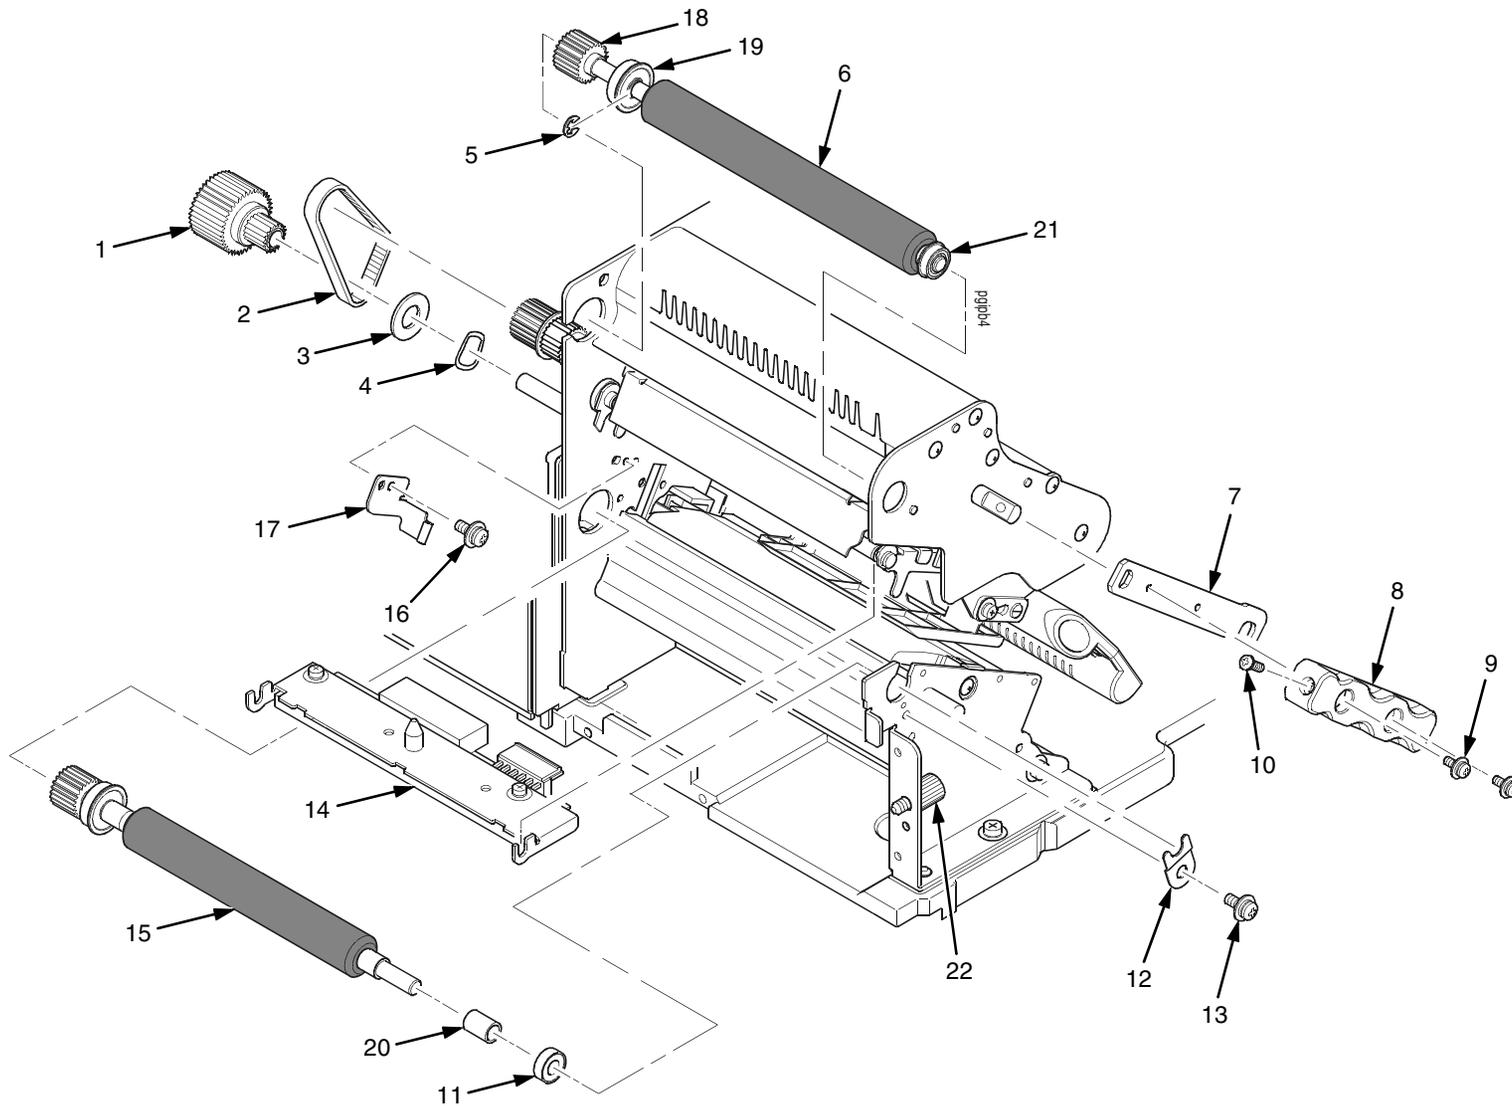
This illustration is an exploded view of the printhead, platen, and ribbon roller assemblies.
